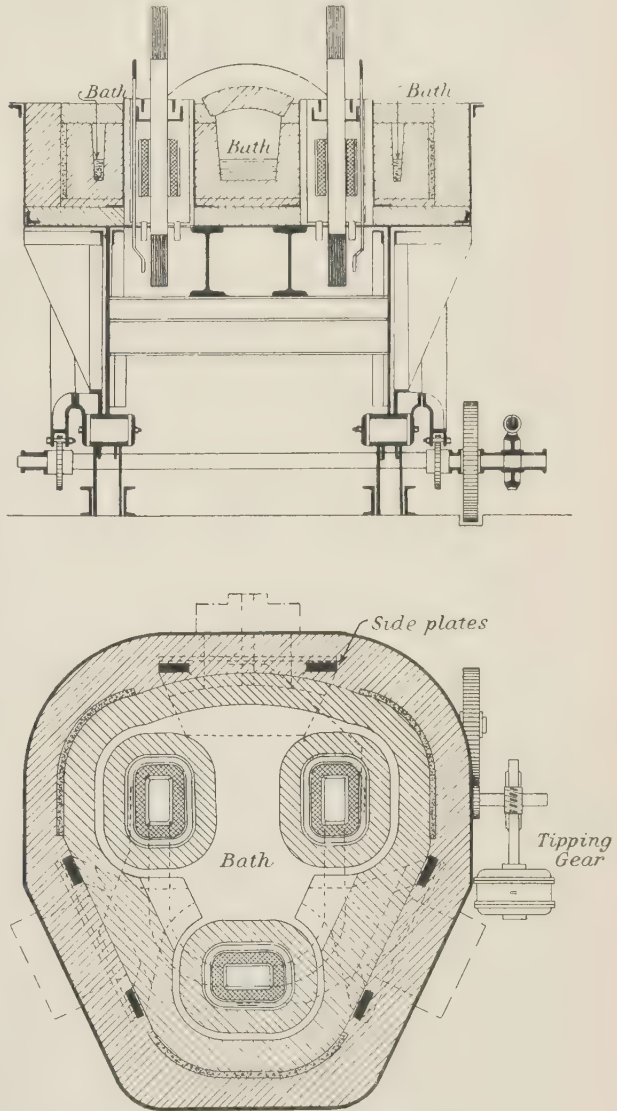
Röchling-Rodenhauser Three-phase Furnace.
